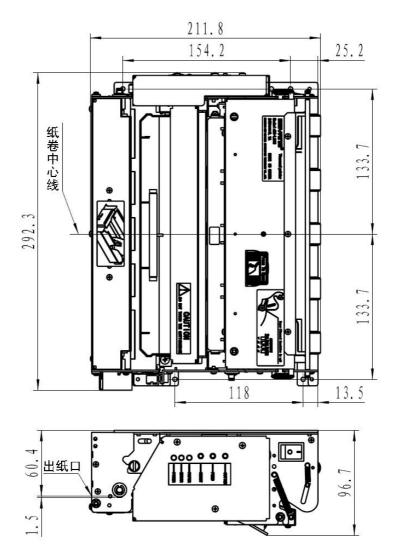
Size drawing of structure without paper frame (212*294*96.7mm)
